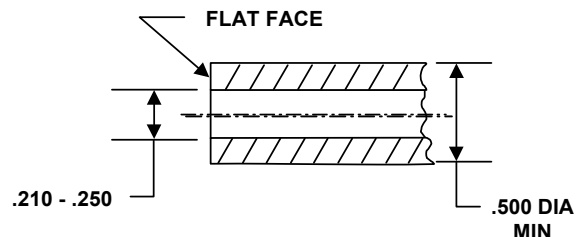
EYELET PRESSING TOOL DIMENSIONS
